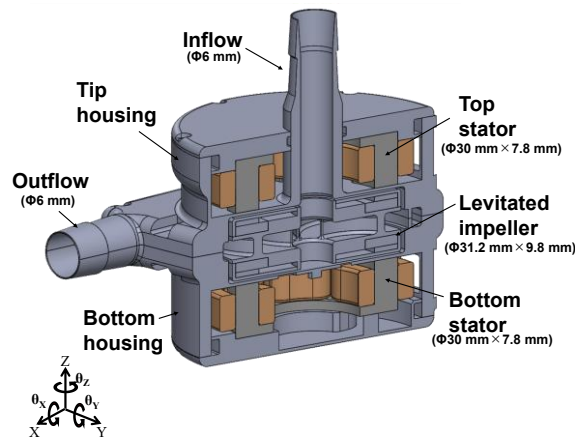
Schematic of the proposed pediatric VAD with axial gap type double stator self-bearing motor
